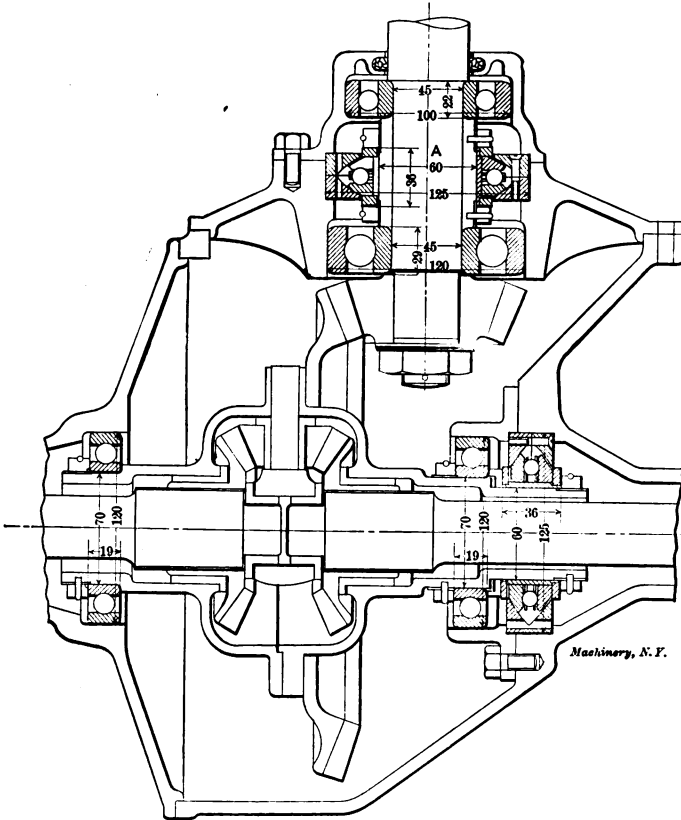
Automobile Rear Axle and Differential Gear equipped with Double Thrust Bearing
